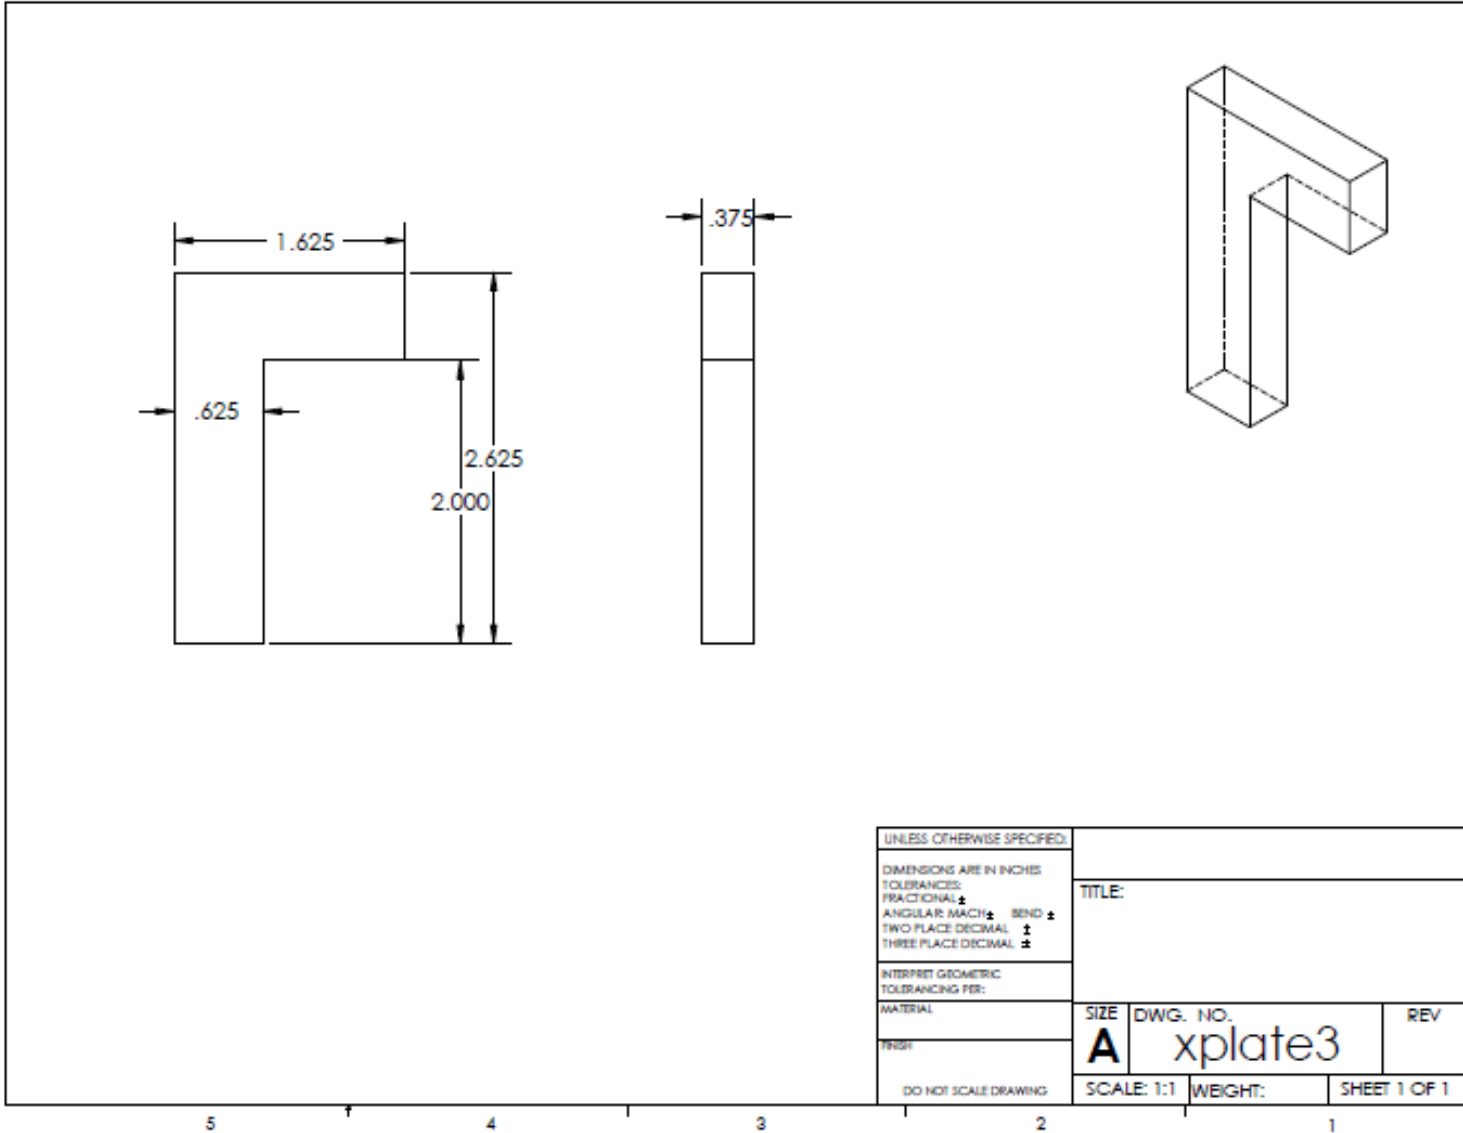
Engineering drawing of the X-axis motor mount plate #3
